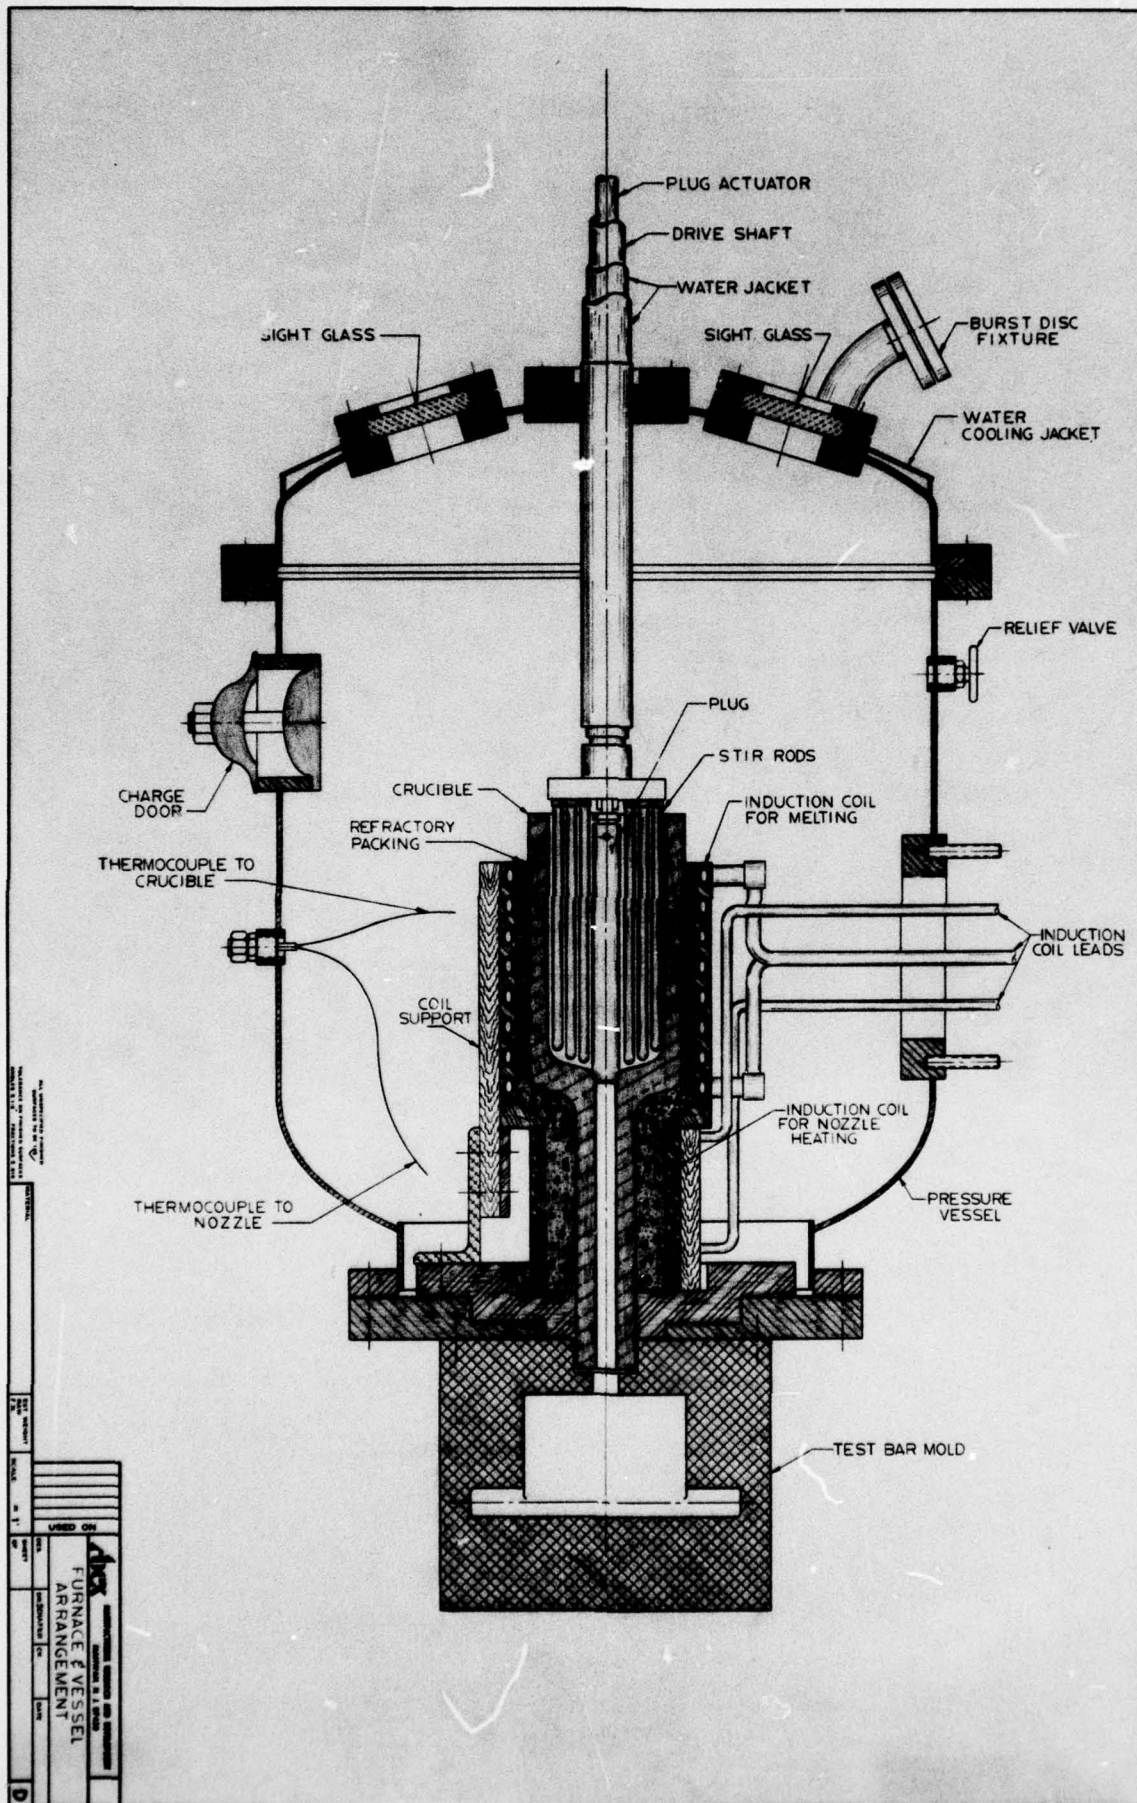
(b). Modified Furnace and Pressure Chamber Assembly.
